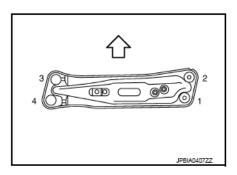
Rear Engine Mounting Member Bolt Tightening Sequence Courtesy of NISSAN NORTH AMERICA, INC.
